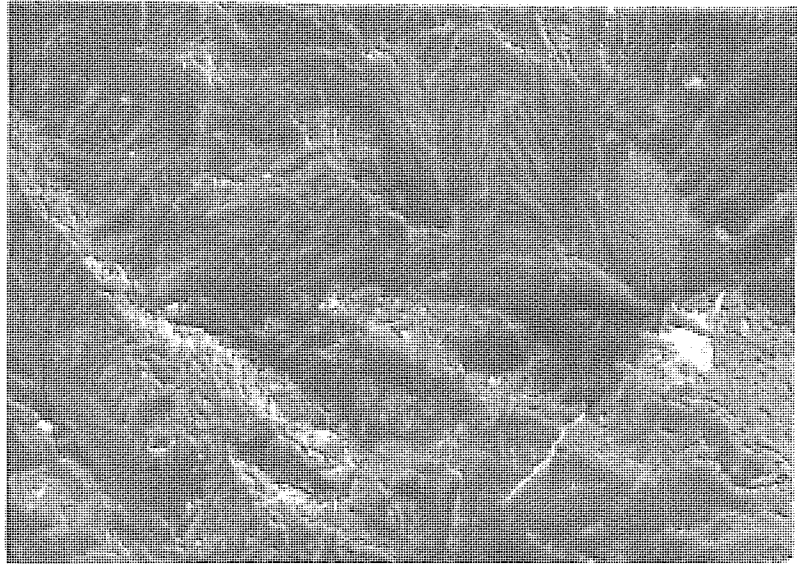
Fracture Surface in the Heat Affected Zone. Tested at Room Temperature in the As-Welded Condition.
